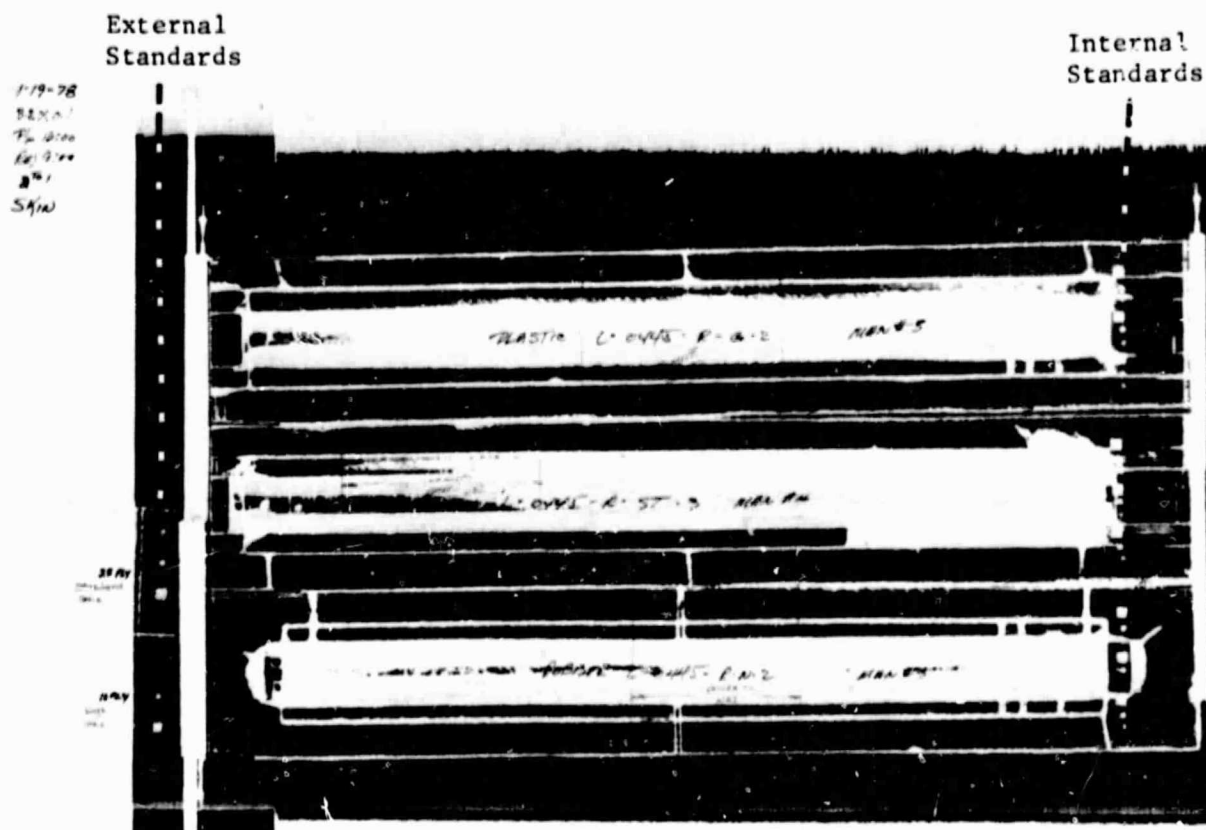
Areas of Initial Single Stage Cure Cover Assembly Specimens Ultrasonically Inspected
